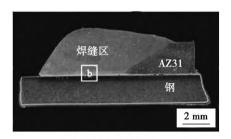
Seam of bypass-current MIG welding-brazed Mg/
